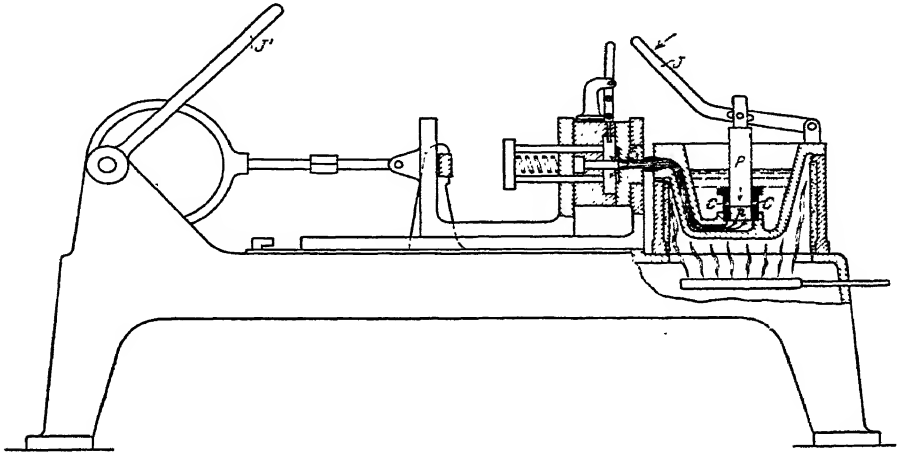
TYPICAL PLUNGER MACHINE IN CASTING POSITION.
